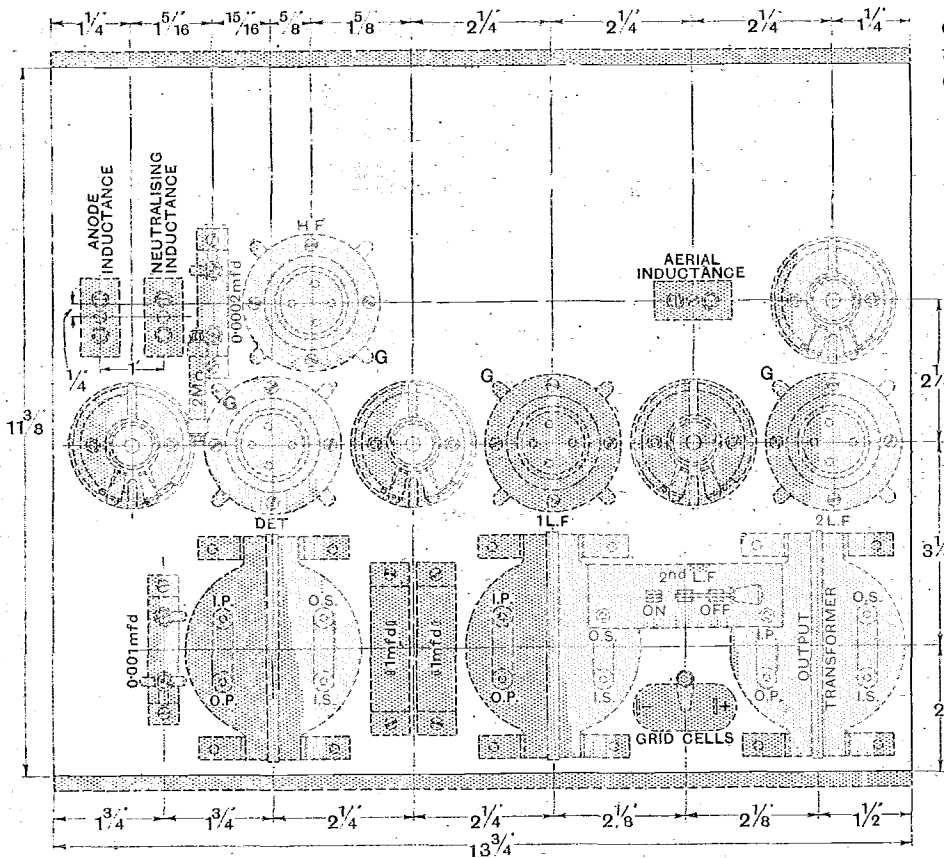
Dimensional layout of the components on the baseboard. The spacing between the centres of the valve holders and filament resistances is 2 in. throughout. Should the parts on the front panel be substituted by components of other make than those shown, care must be taken to ensure that they will not come into contact with the apparatus on the baseboard when assembled. The position of the coil holders gives clearance for Gambrell type inductances.
